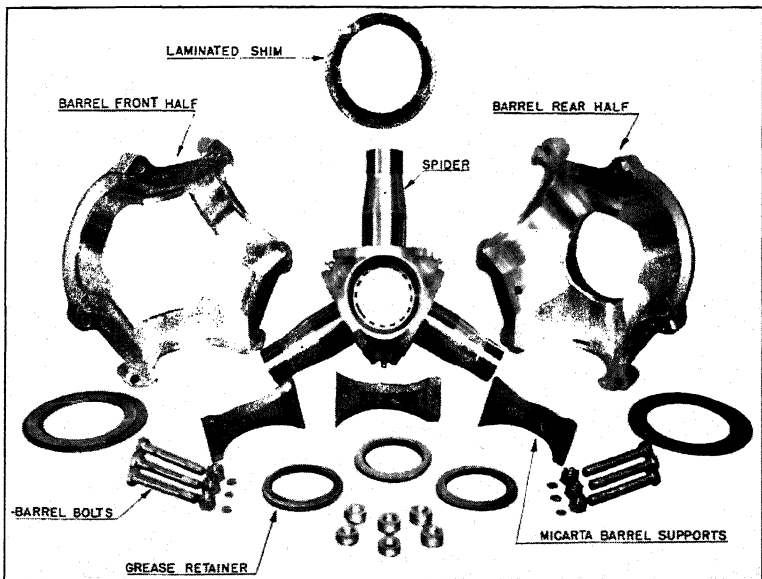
Hamilton Standard hub construction. (Courtesy Hamilton Standard Division, United Aircraft Corp.)
